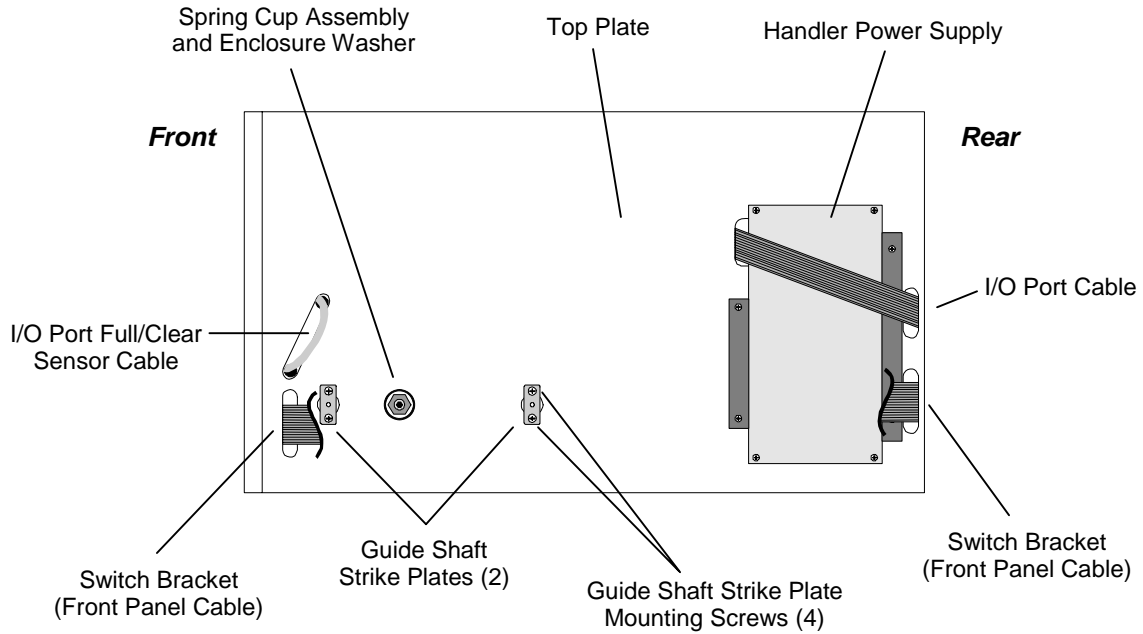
Single Bay TLS Cabinet – Top View (Top Panel Removed)
